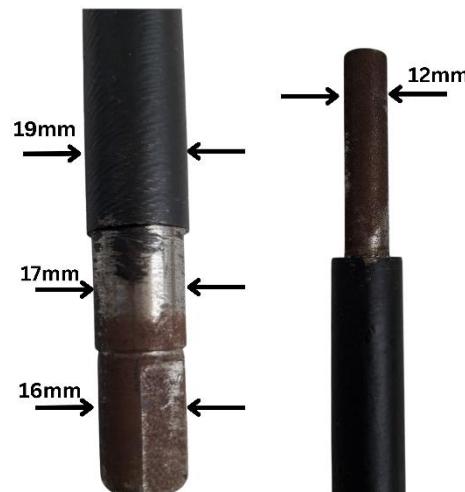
Lathe Manipulated Dimensions of Shaft
